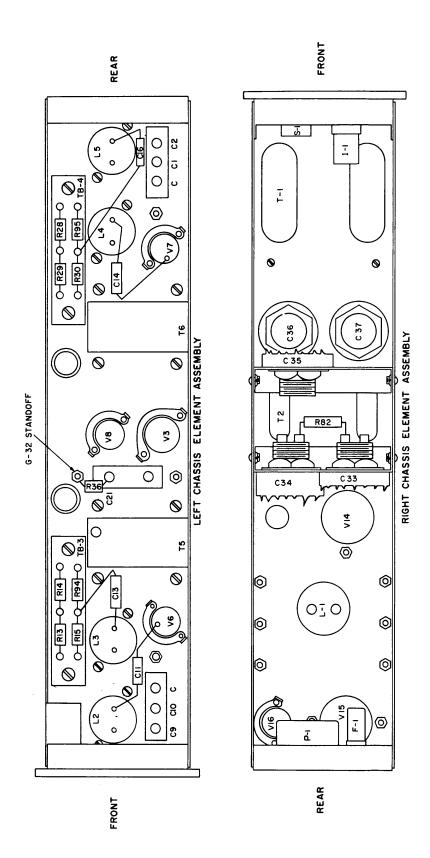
Model CFA, Component Layout, Left and Right Views
